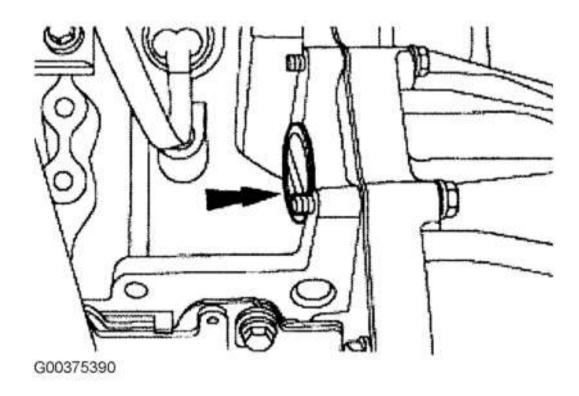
Locating Torque Converter Access Cover Courtesy of FORD MOTOR CO.
